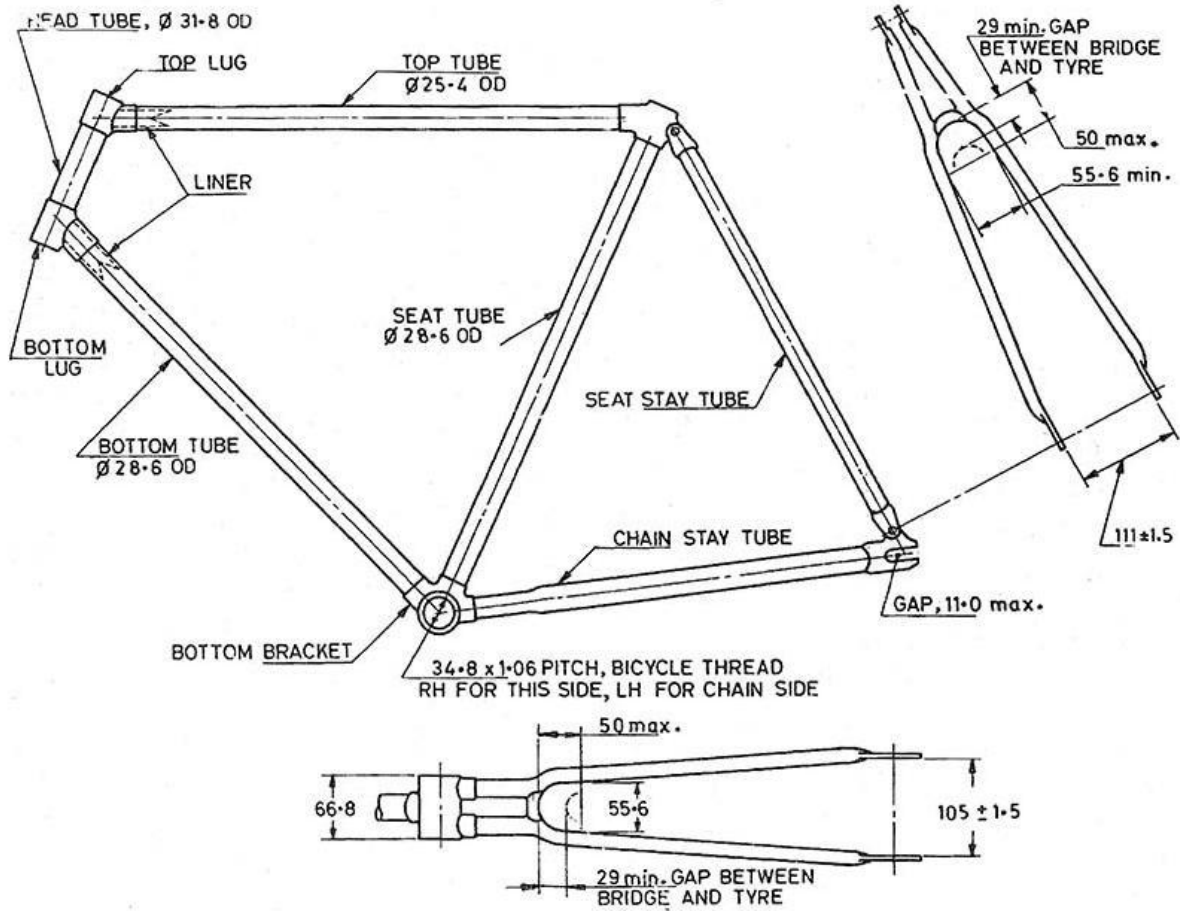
Basic tube's ods in a male bicycle frame. All dimensions in millimeters.
